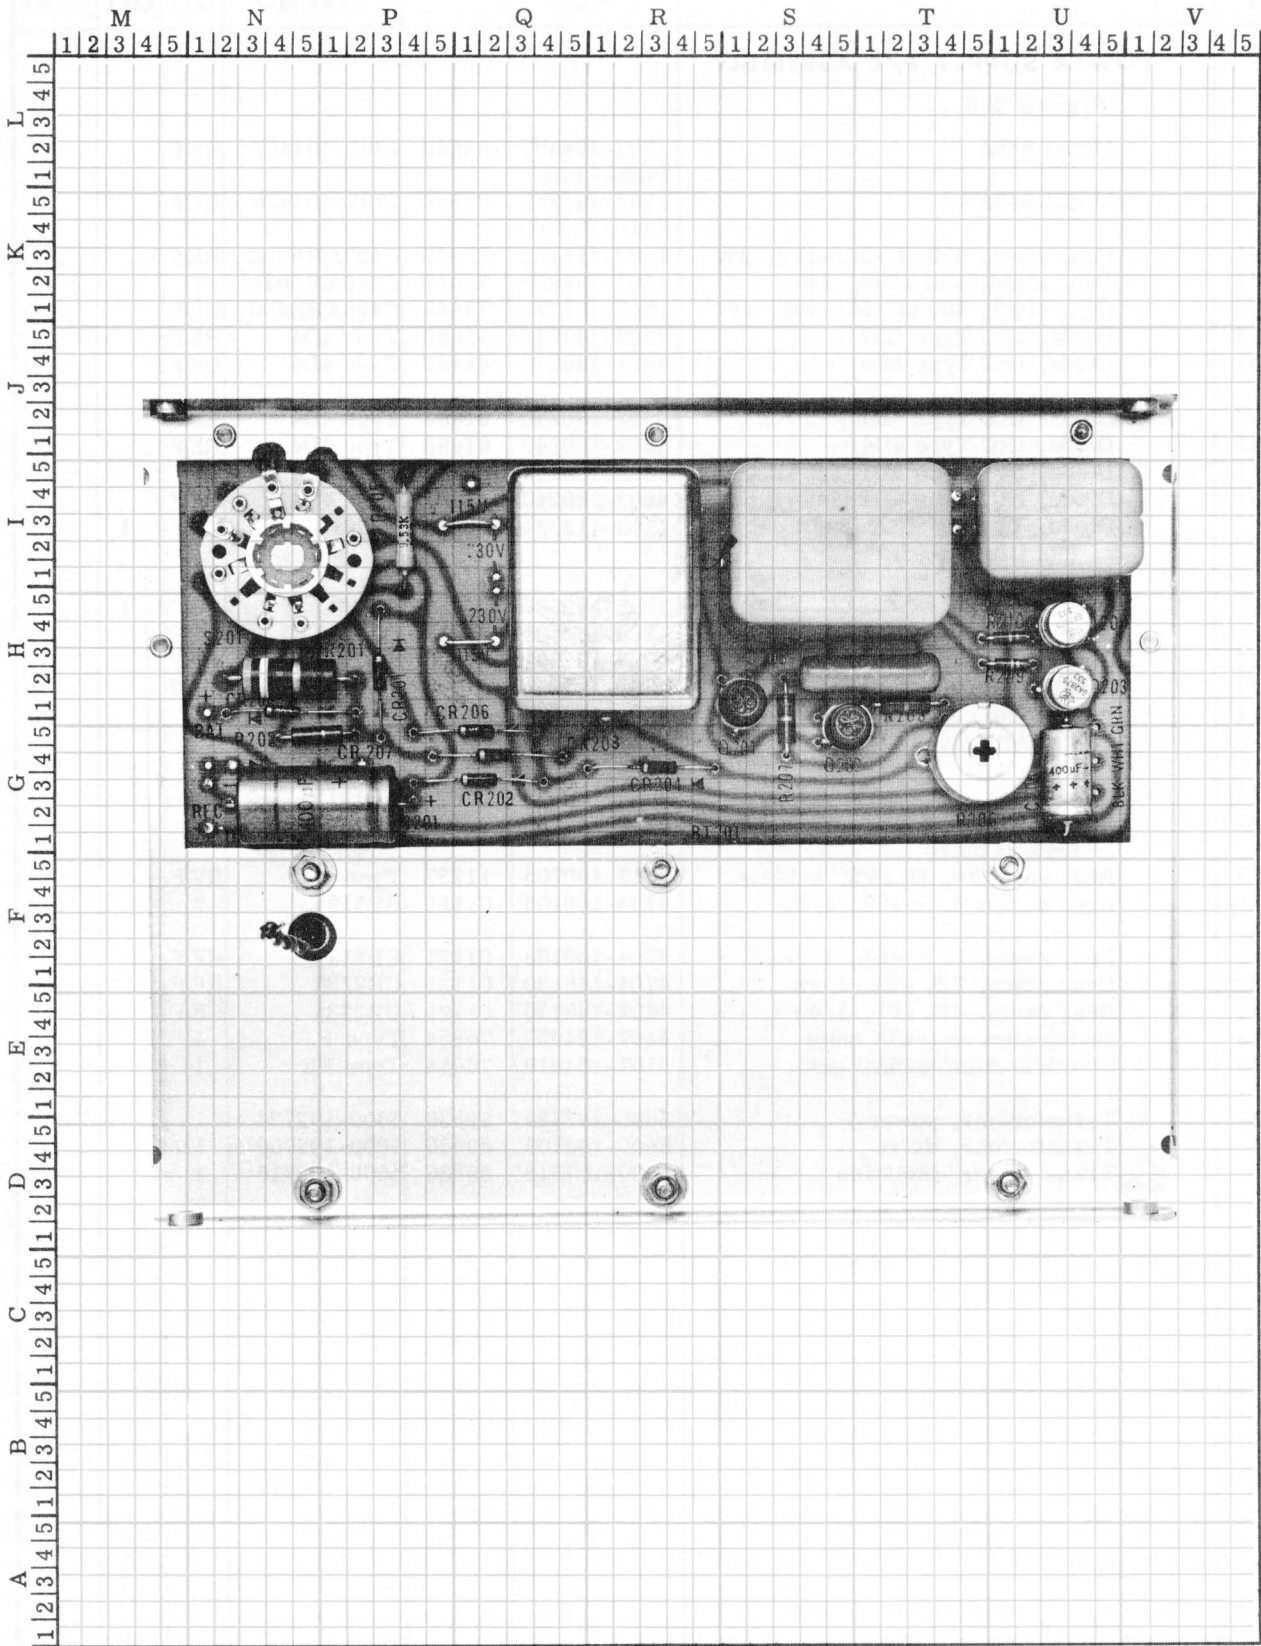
POWER SUPPLY P/C ASSEMBLY
